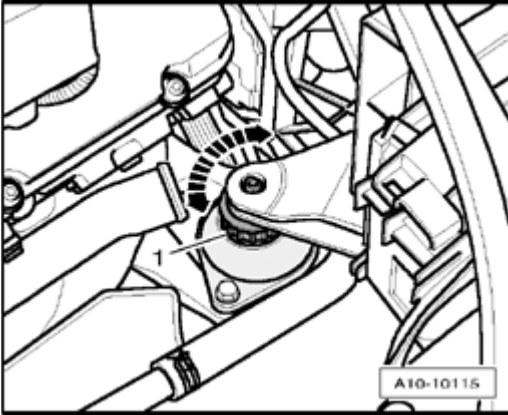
Turning Adjustment Ring On Torque Support Valve N382 Clockwise Until Stop
